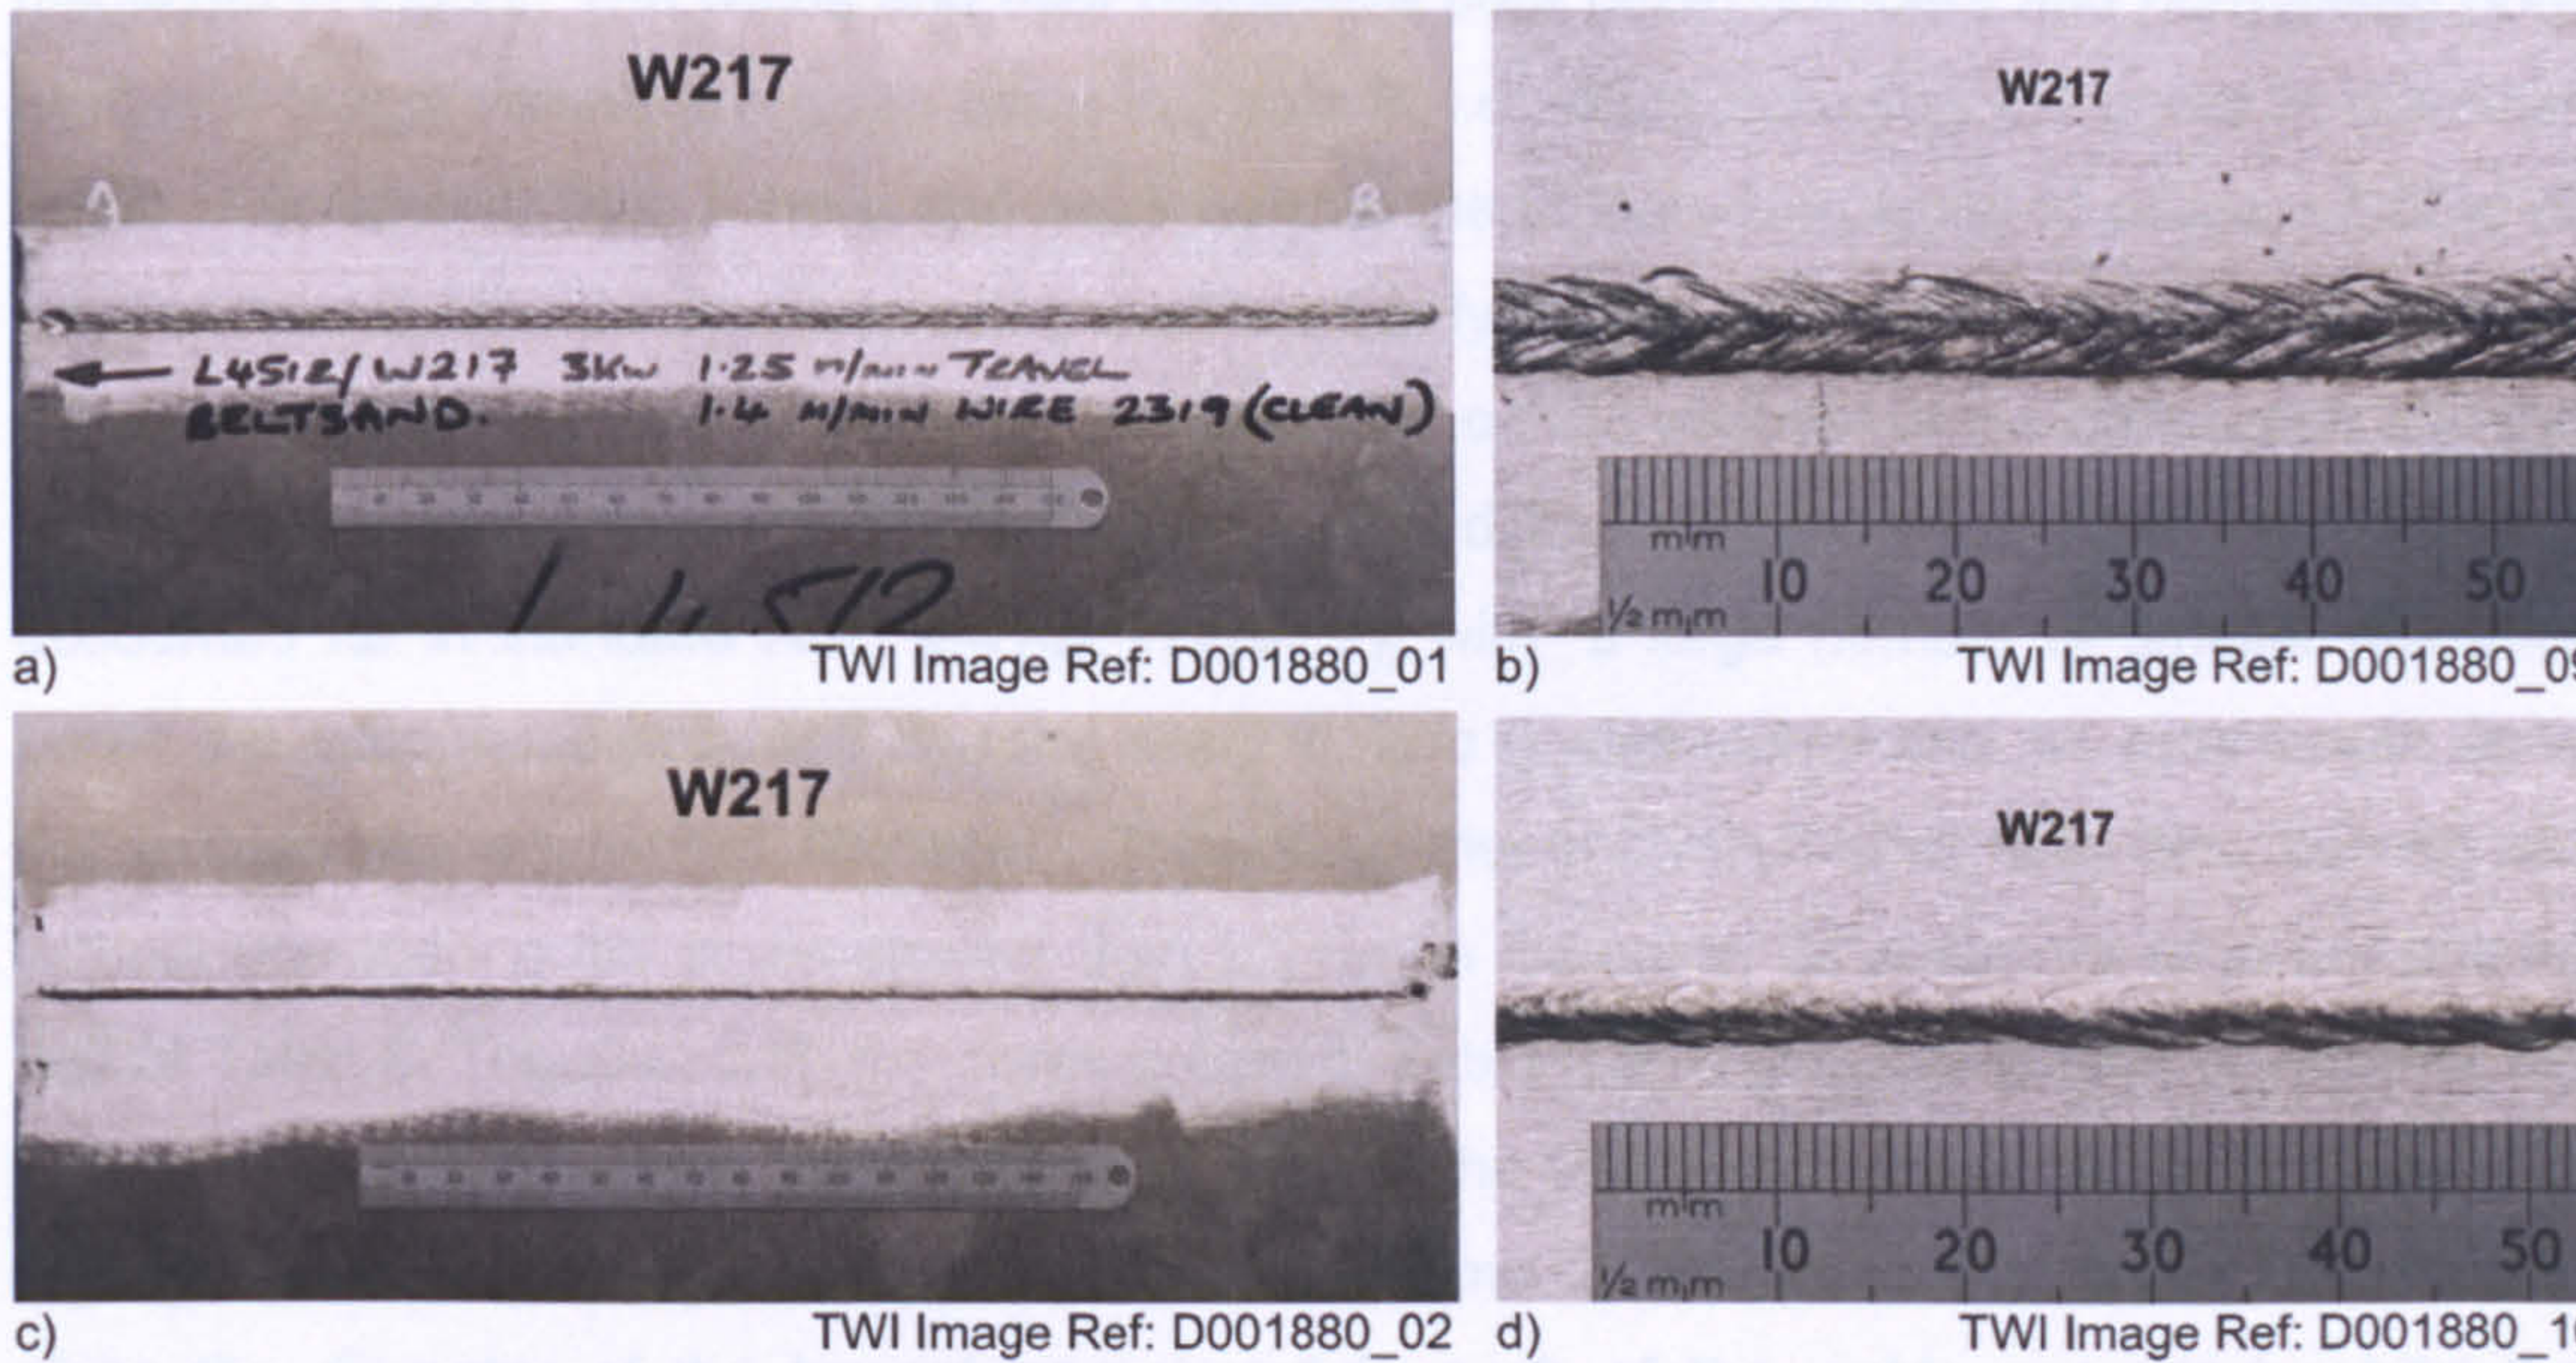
Weld bead appearance of a weld produced on linished samples in 3.2mm thickness 2024 aluminium alloy, using 3kW of laser power, Ø0.6mm spot size, focus 0mm, 1.25m/min welding speed, 1.4m/min WFS:
